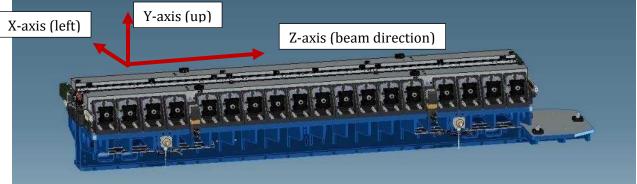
Datum C on drawing 29H866 should be the tertiary datum feature.
